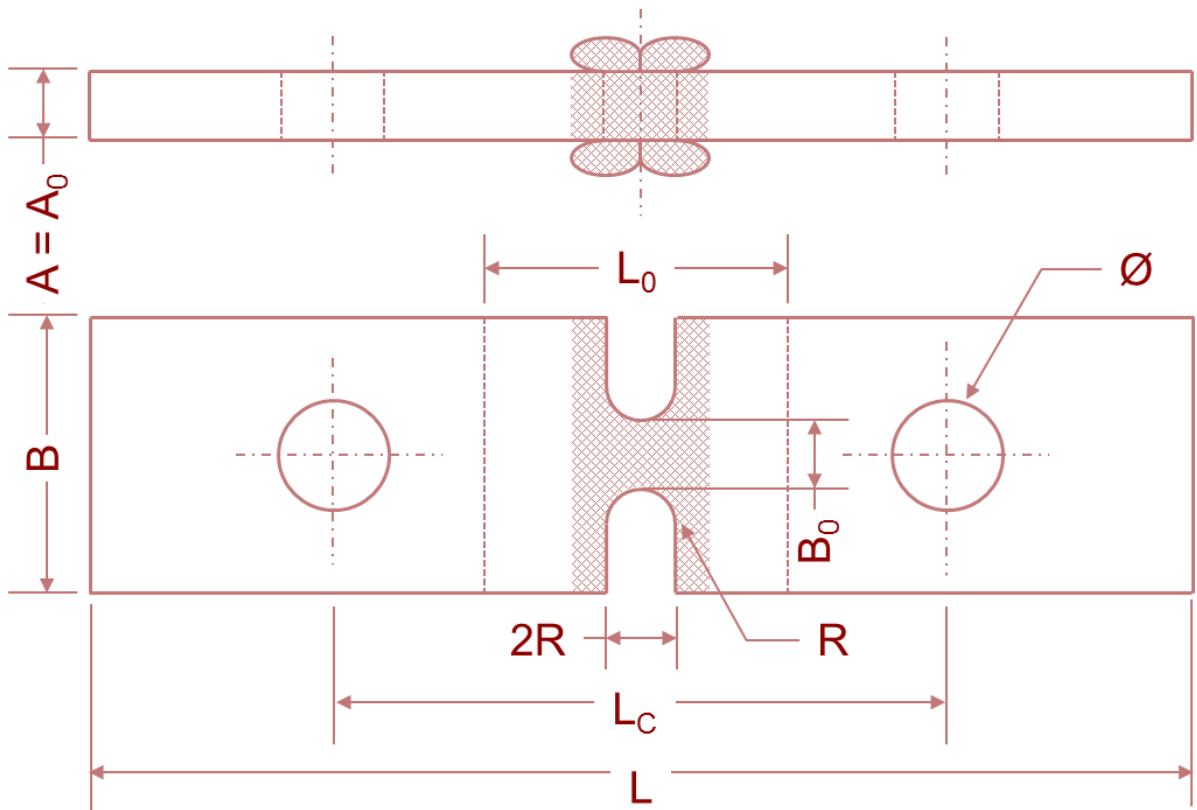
Geometry and dimensions of a waisted tensile specimen from EN 12814-7 (BS, 2002)
